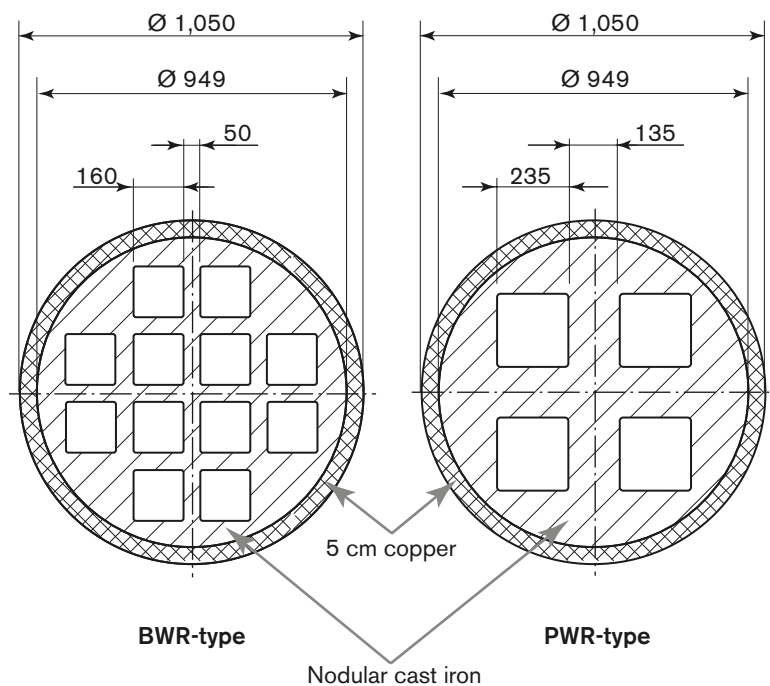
Dimensions (in mm) of the cross section of the BWR and PWR inserts.
